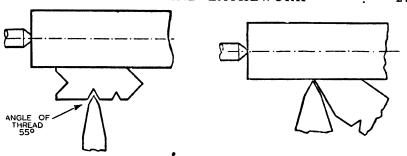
Methods of setting screw-cutting tool with centre gauge
